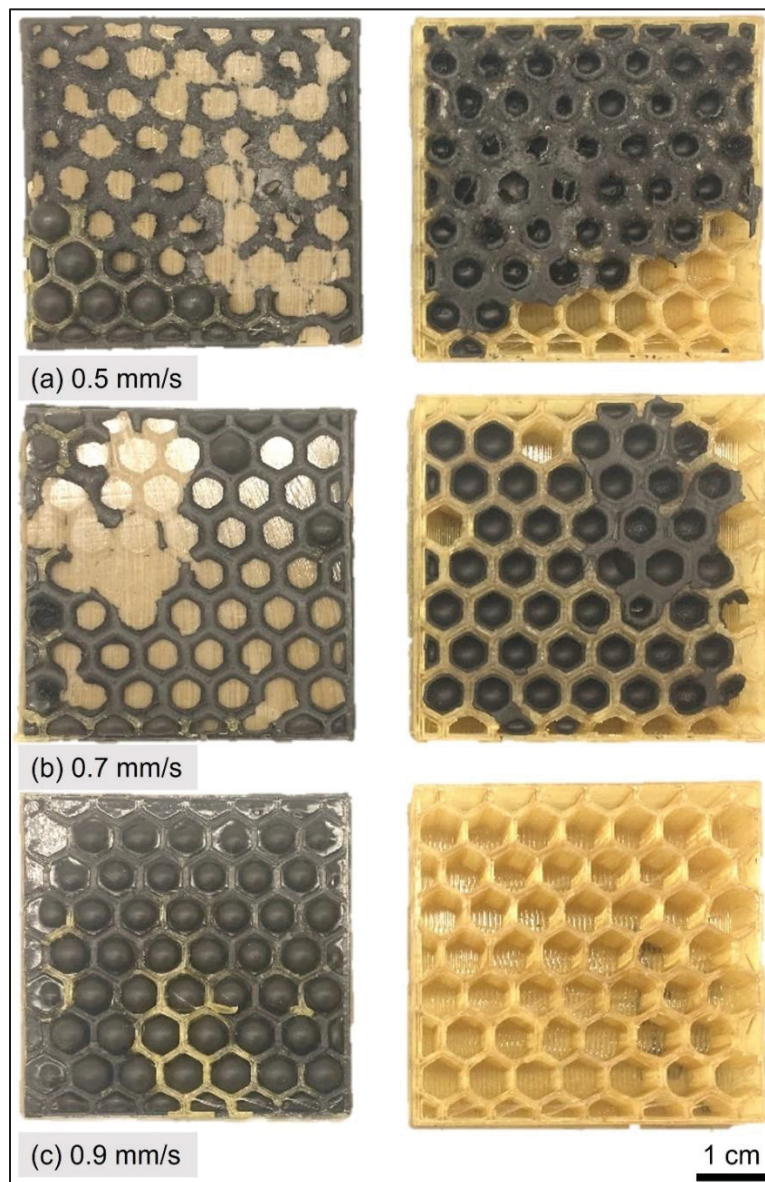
Fractured FWT sandwich samples welded at (a) 0.5 mm/s, (b) 0.7 mm/s, (c) 0.9 mm/s)
